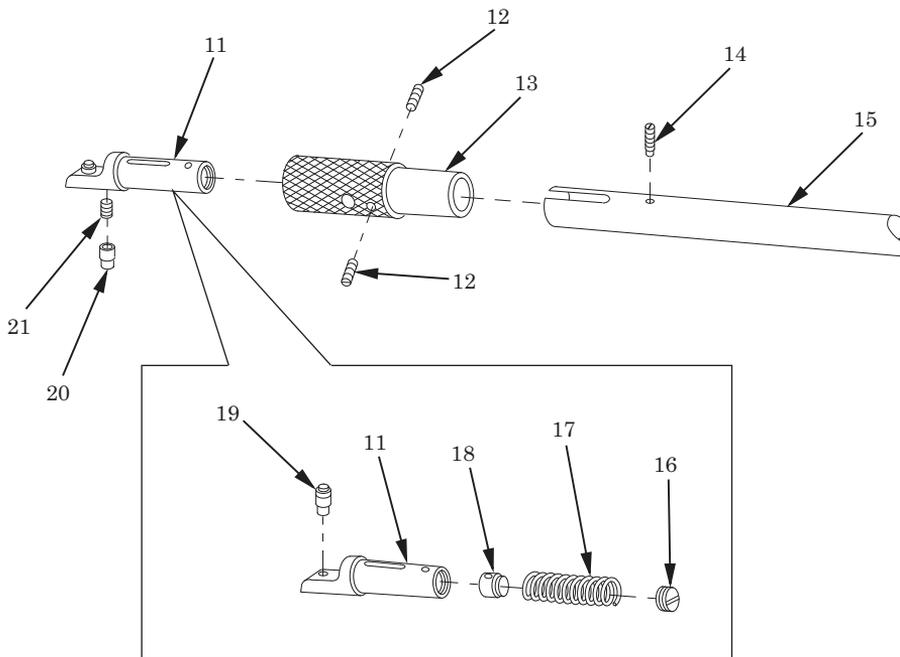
Disassembly of Bottom Cleaning Staff Section.
